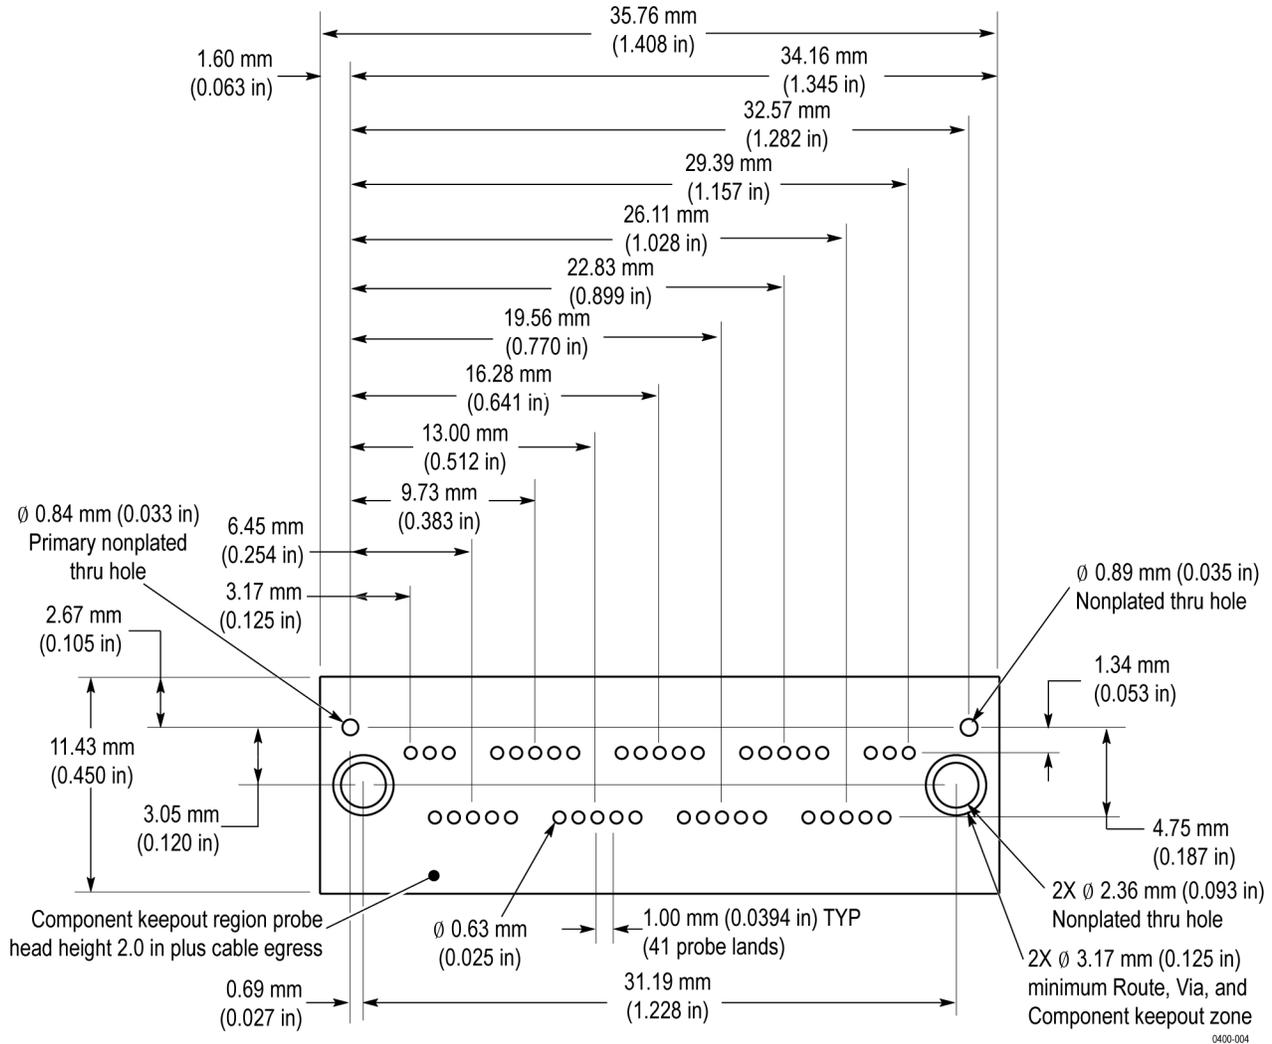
x8 midbus footprint dimensions and keep-out area (front side of circuit board)
